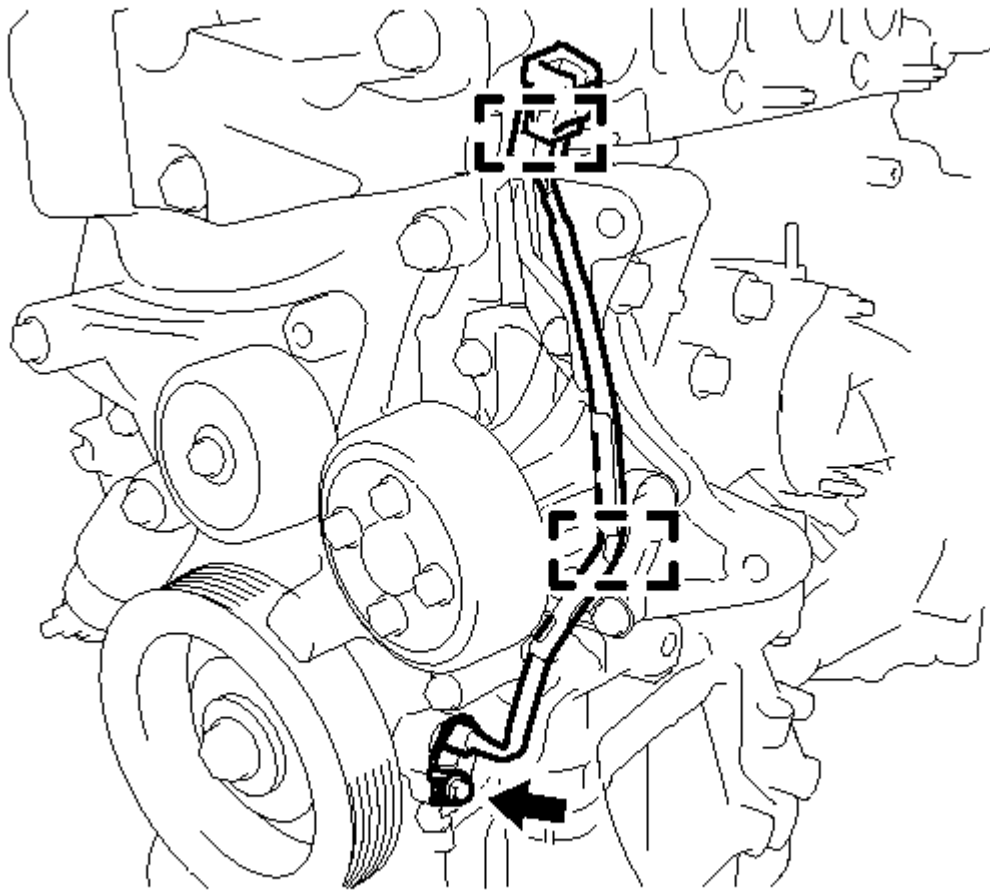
Identifying Crankshaft Position Sensor Connector And Clamps (Except TMC Made Engine)
